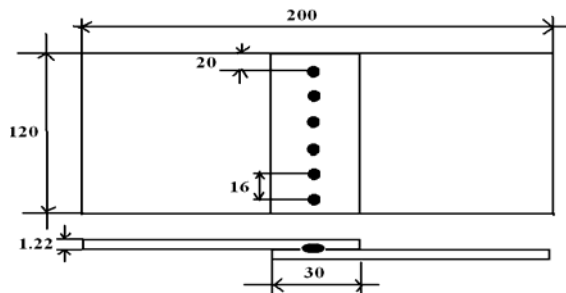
Dimensions of tensile-shear test specimens (not to scale, dimensions in mm).
